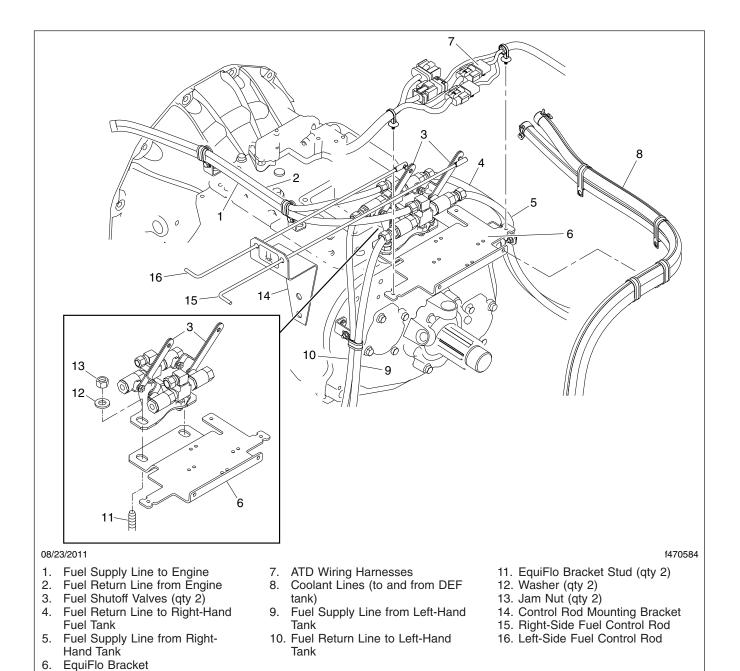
, Fuel Shutoff Valve Assembly, Dual-Tank Vehicle
